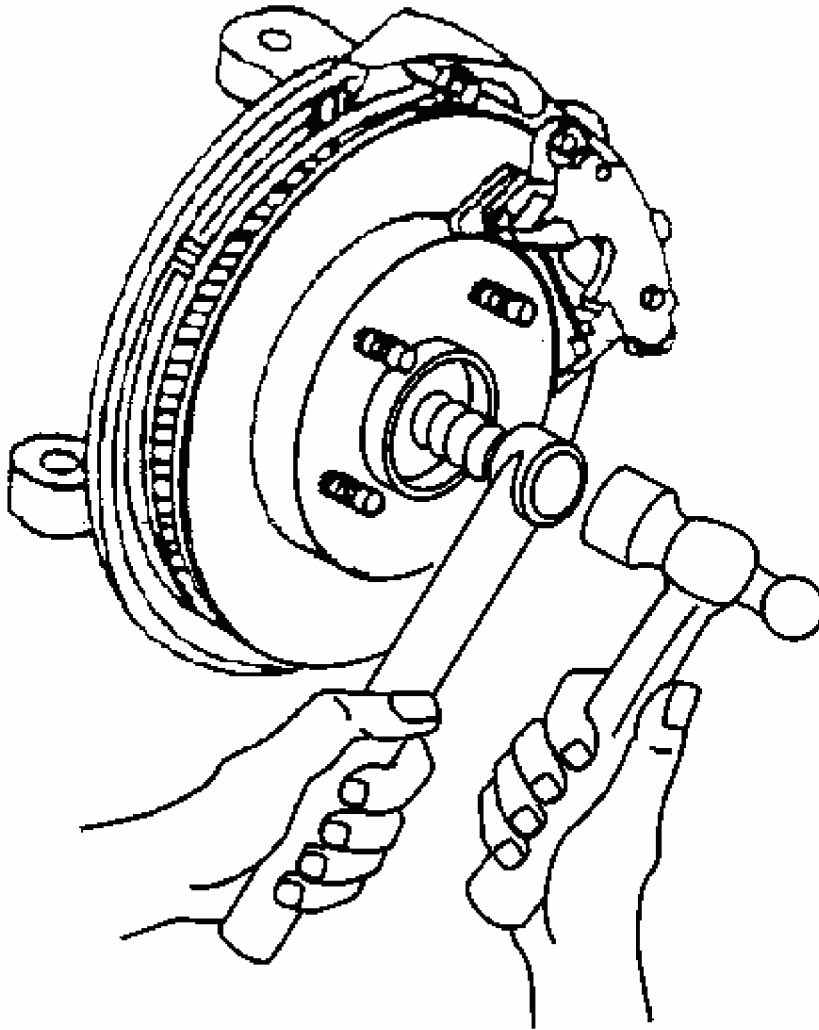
Disengaging Wheel Drive Shaft From Hub
